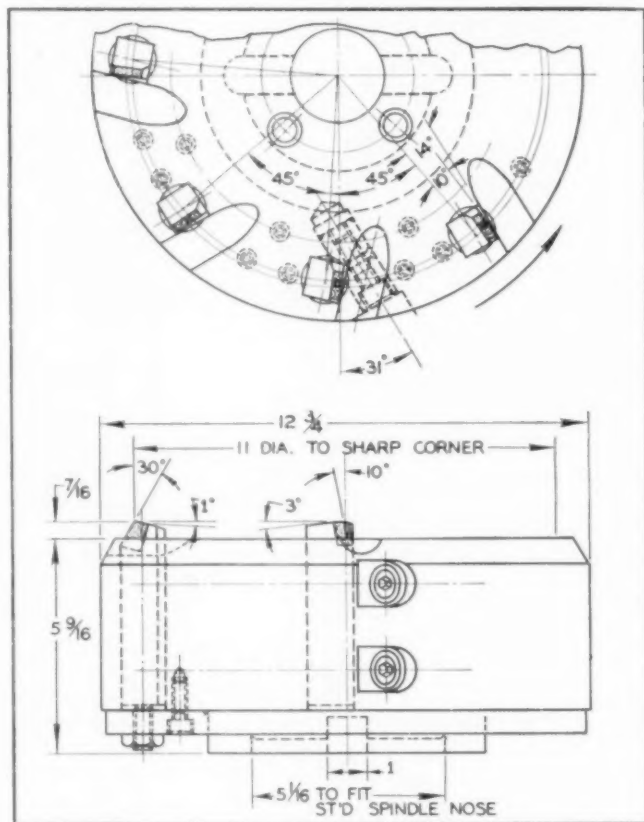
Milling cutter with positive axial and negative radial rake angles designed for face milling alloy steels.
